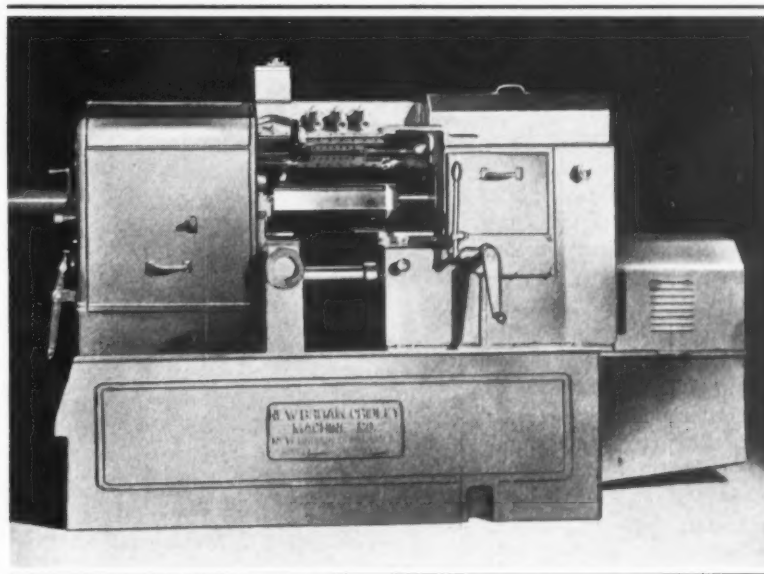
New Britain Automatic Screw Machine which Stops by Itself when the Stock is too Short for Machining a Full Length Piece
